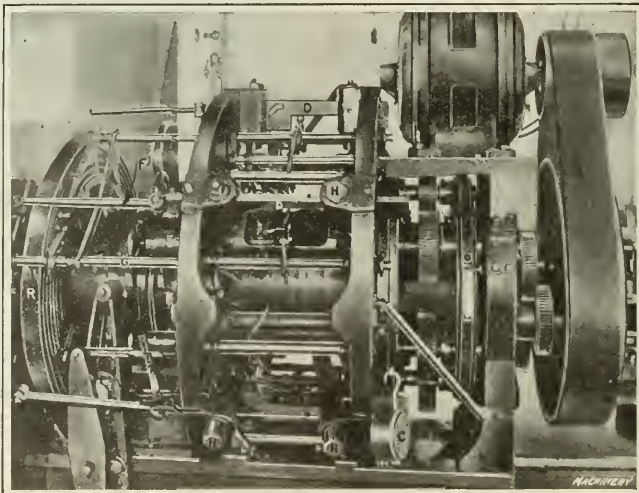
Rear View of Machine shown in Fig. 7, illustrating Operating Cams, Tool-holders, etc.
